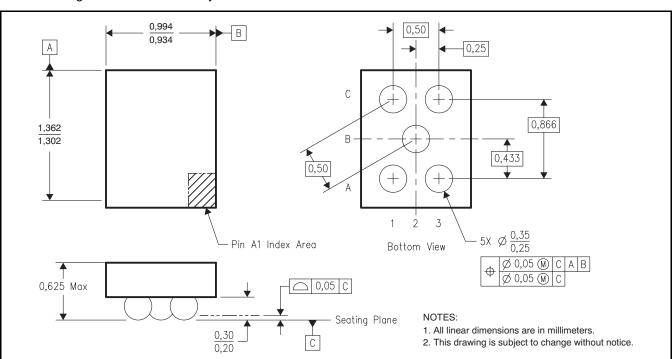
YZU Wafer Chip-Scale Package Dimensions (in mm)
